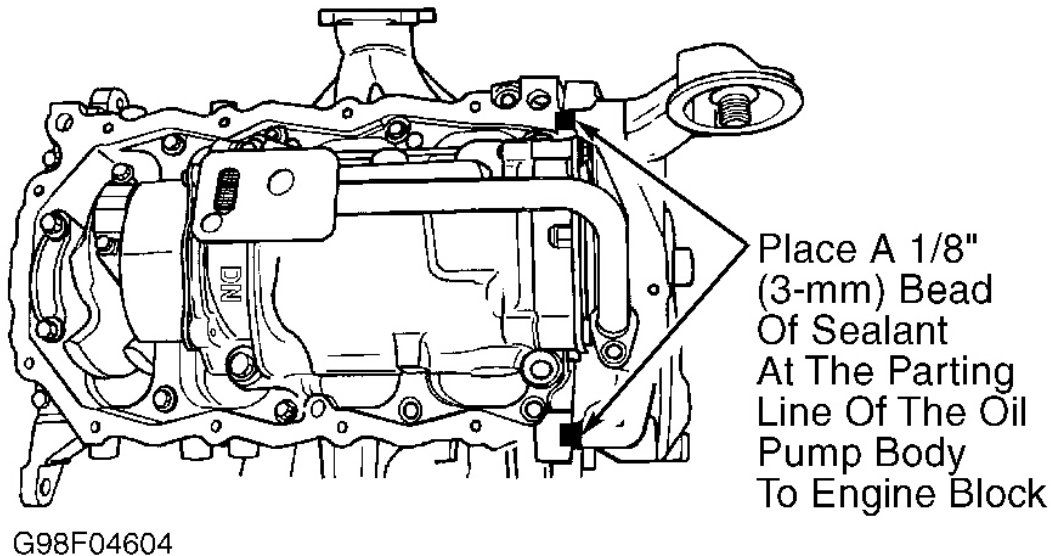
Applying Silicone Rubber Adhesive To Engine Block Parting Line
